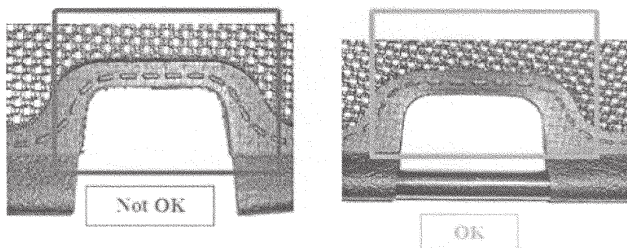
Burr acceptable/ not acceptable on welding joints edges
